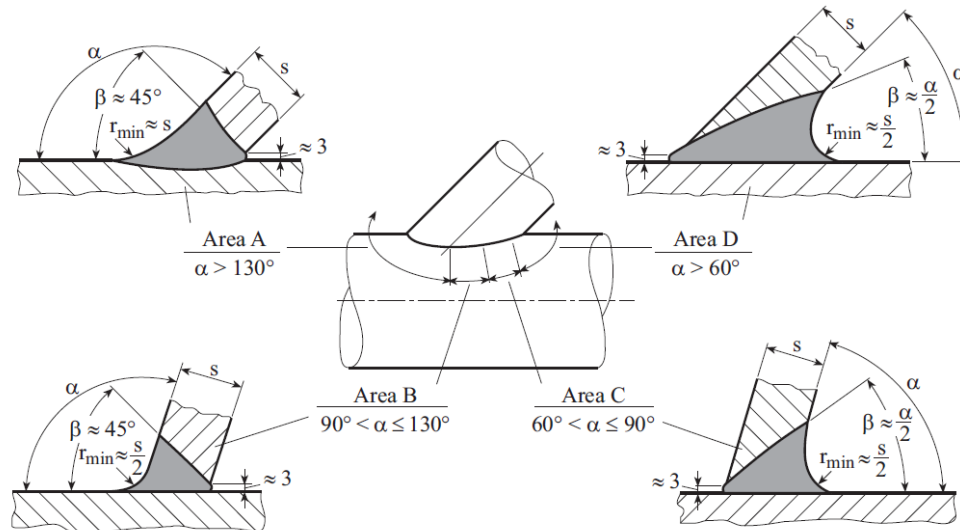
Single-sided weld connections (tube connections not accessible from inside)
